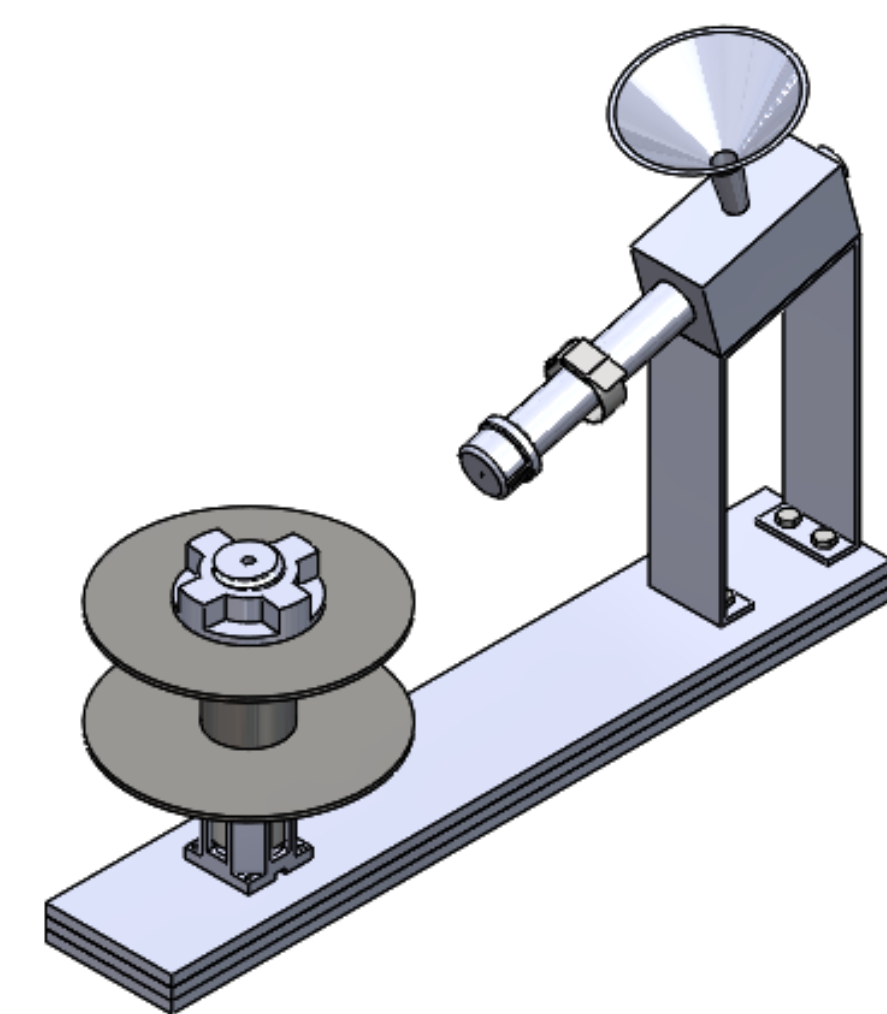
CAD Model of Extruder and Spooler, Isometric View
